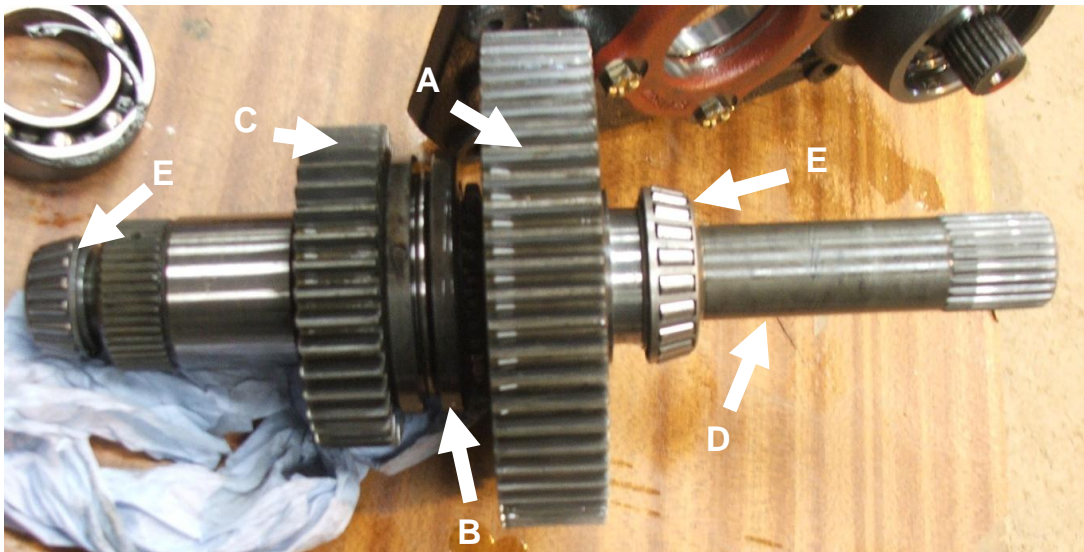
The rear output shaft, showing the low-ratio drive gear (A), and its dog clutch (B), the front wheel drive take-off gear (C), and the section of plain shaft used as the sensor zone for the rear Torductor (D). The axial location of the sensor zone is controlled by taper-roller bearings (E). (Source, author)
